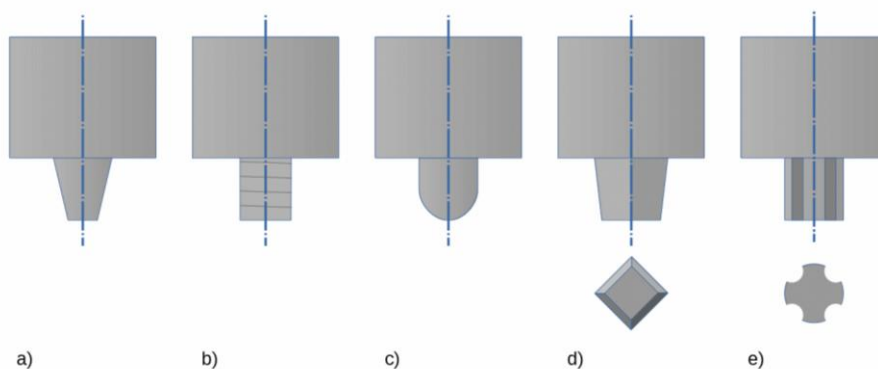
Various FSW tool pin geometrical features: a) conical b) threaded cylindrical c) domed end d) tapered with flats e) fluted
